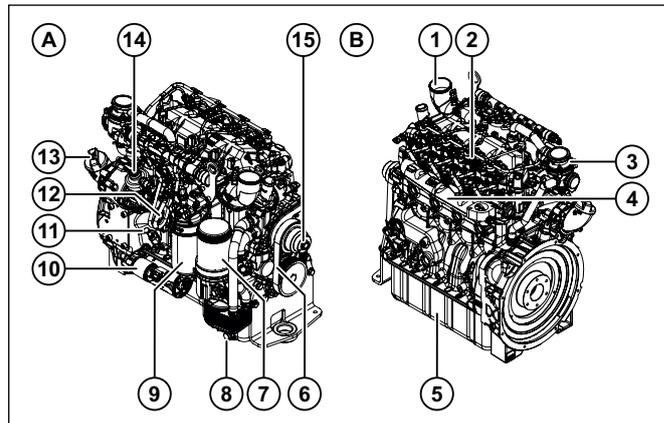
Diesel engine assemblies (Hatz diesel engine)
